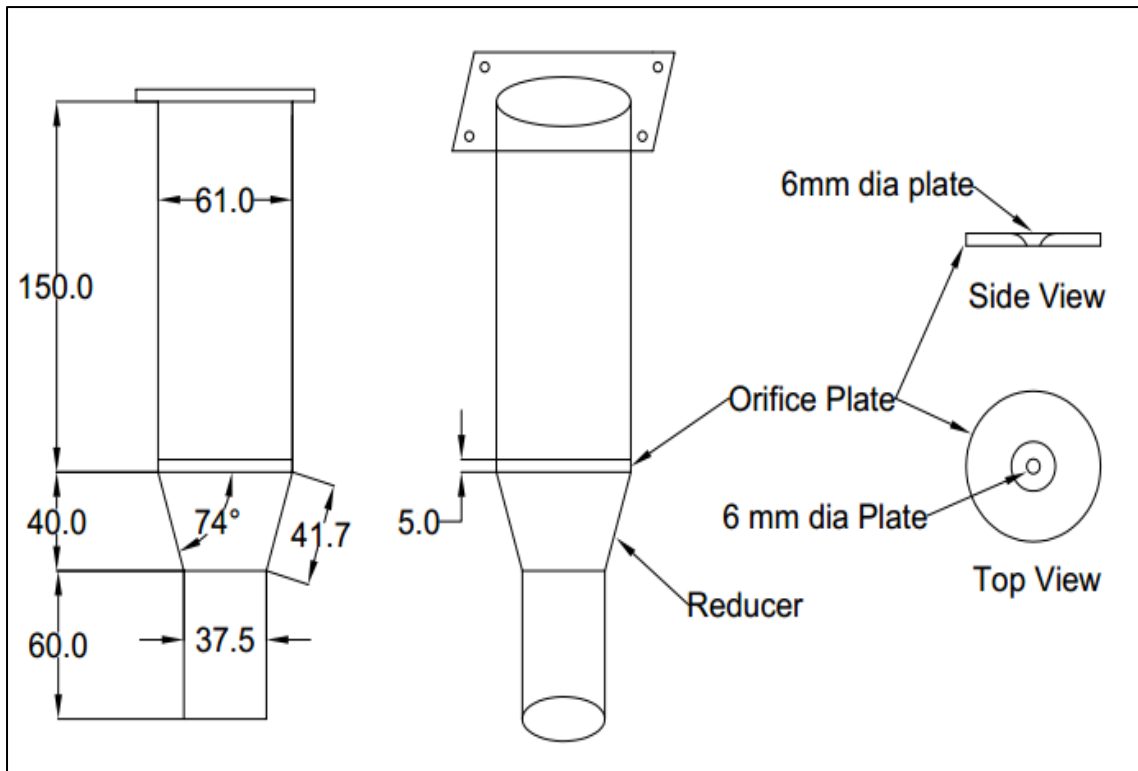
Schematic Diagram of Orifice Plate and Reducer (All Dimensions in mm)
